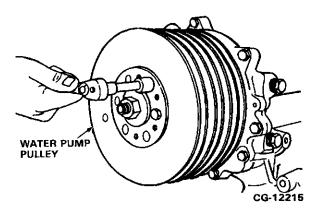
Remove the Water Pump Pulley Bolts (Six Groove Pulley Shown)
